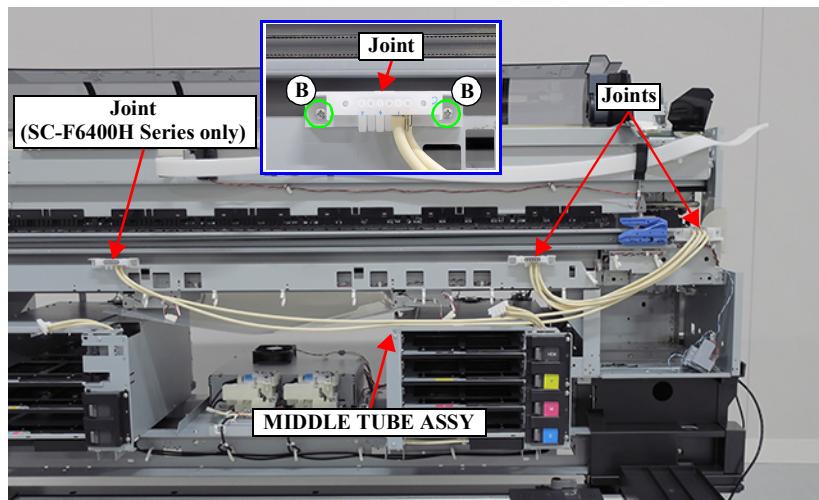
Removing the MIDDLE TUBE ASSY (4)
